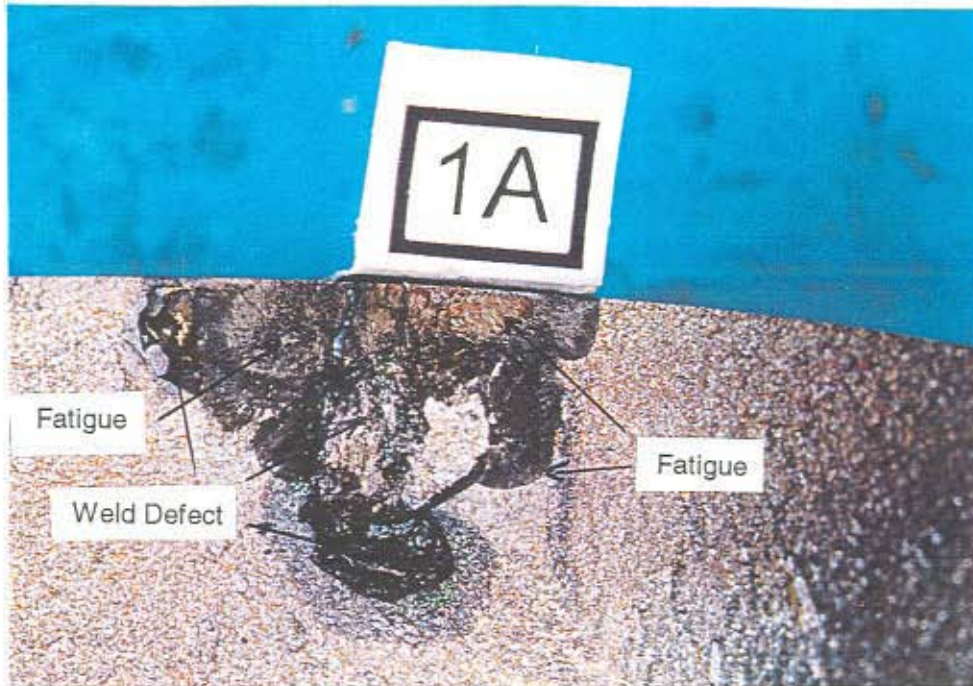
Crack Surface From Keyway 1A After Ultrasonic Cleaning of the Surface.
